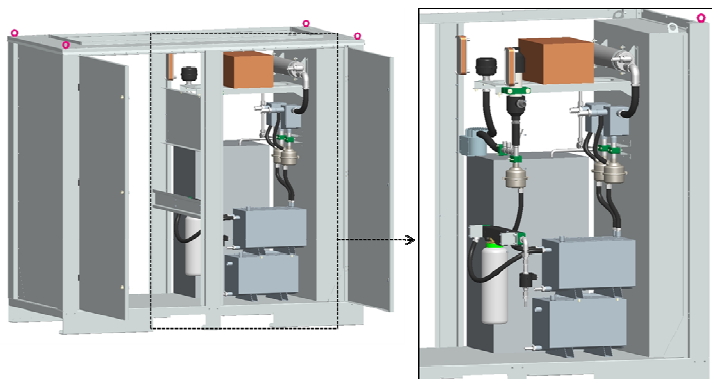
CAD view of the PEMFC-CHP SOPRANO module.
